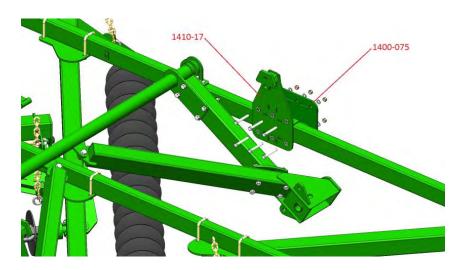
Attachment of Hydraulic Lift Mount 1410-17
